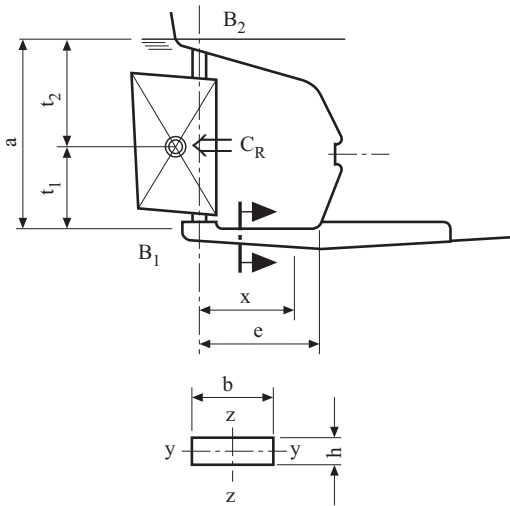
Arrangement of rudder bearings for a rudder with sole piece
